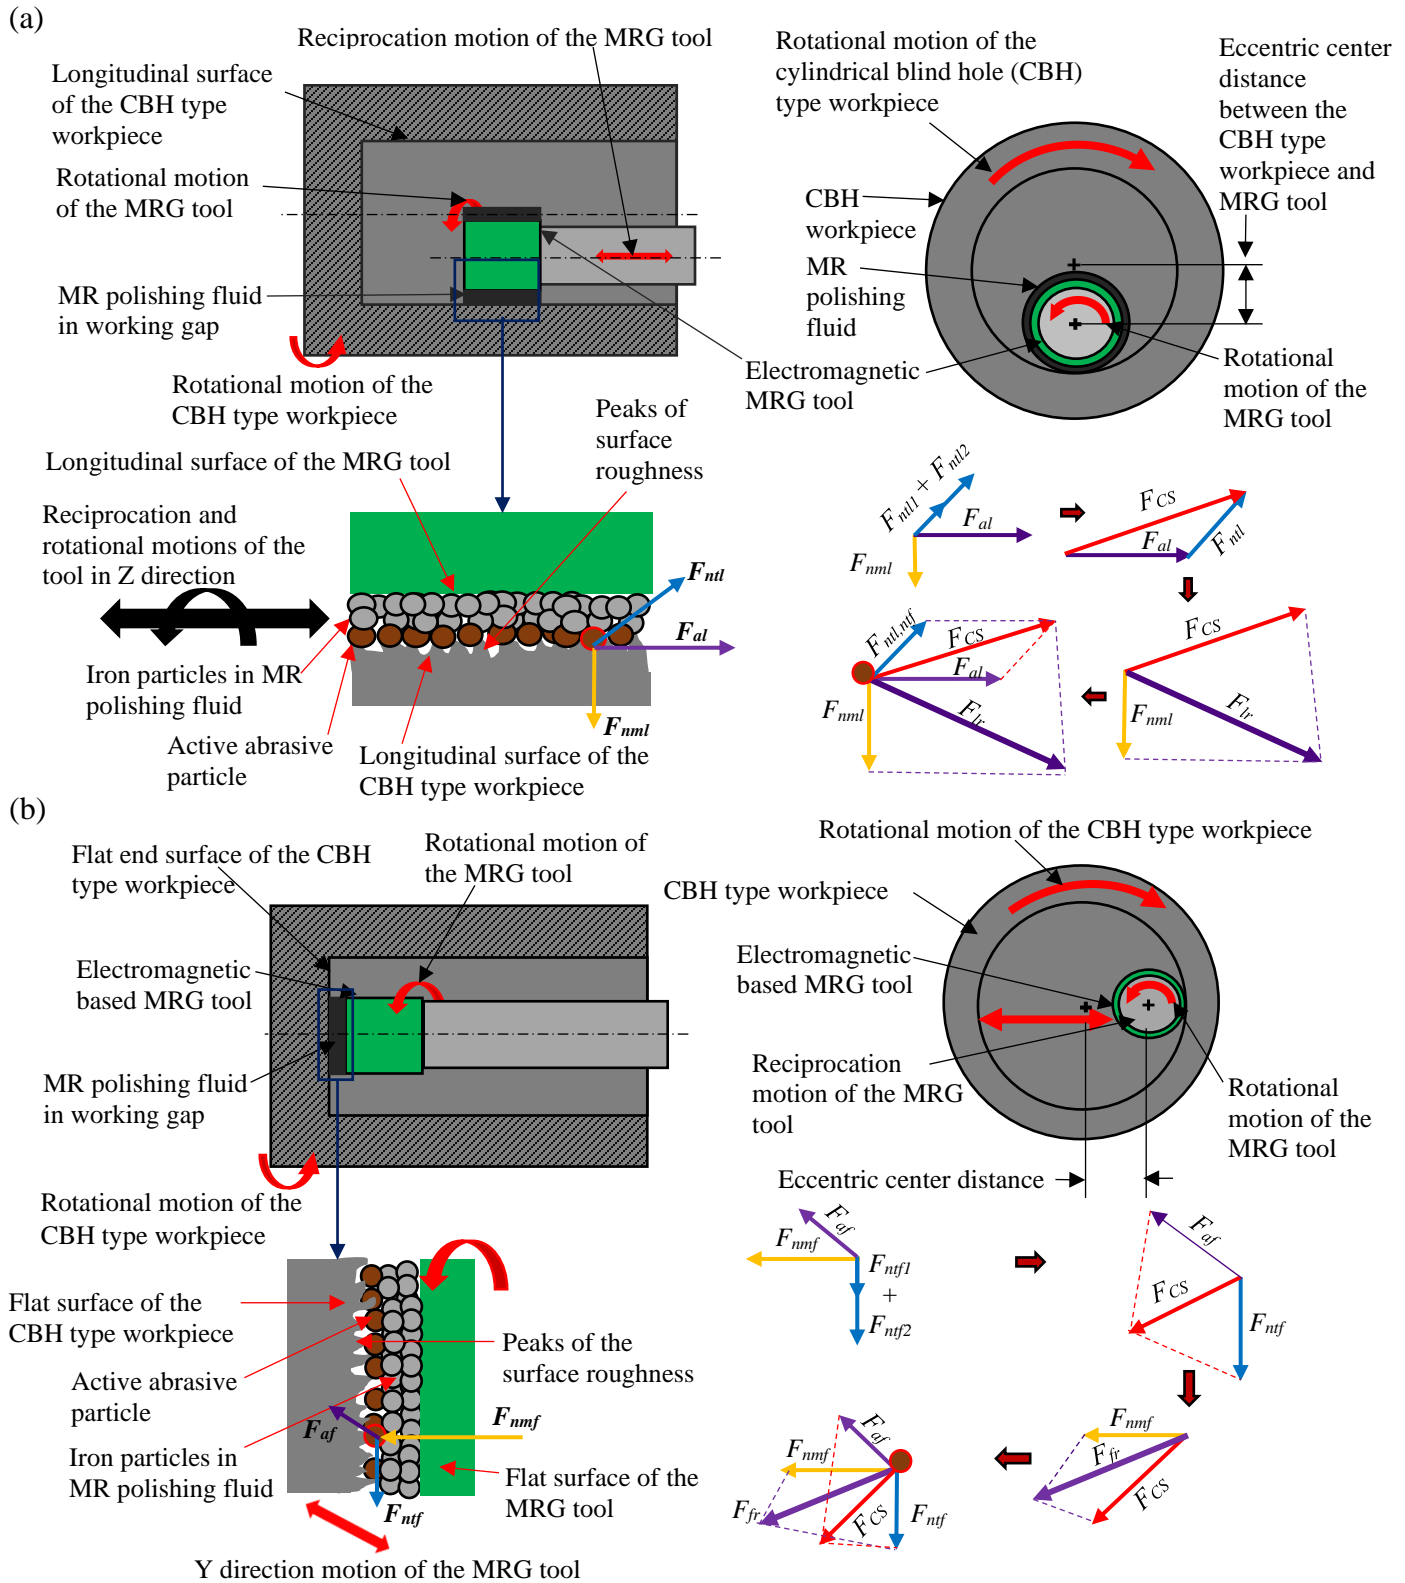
Schematic diagram of finishing mechanism of (a) longitudinal surface and (b) flat end surface of the cylindrical blind hole (CBH) type workpiece with the newly designed MR grinding (MRG) tool.
